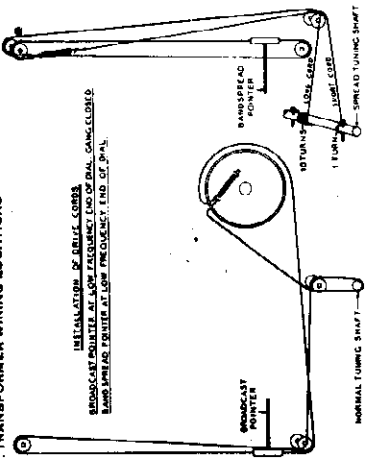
INSTALLING TUNING DRIVE CORDS
